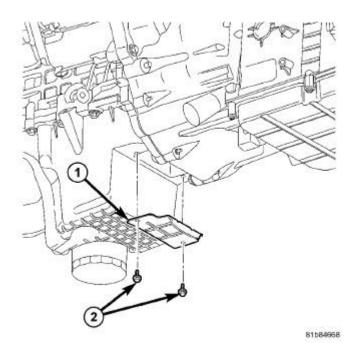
Flex Plate Inspection Cover & Fasteners
